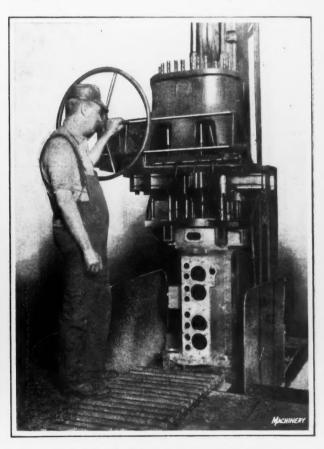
Multiple-spindle Drilling Machine used for drilling Nineteen Holes in the Bell-housing End of the Crankcase
